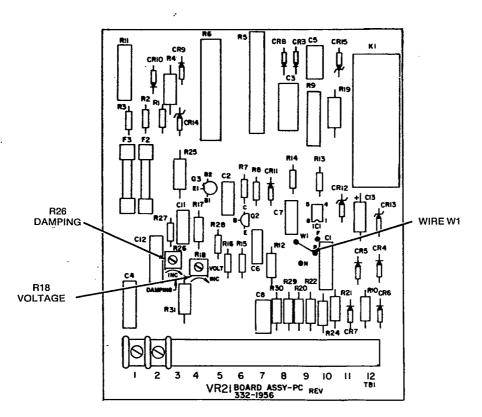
VR21 PRINTED CIRCUIT BOARD
